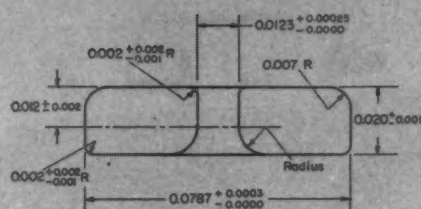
Typical ring jewel, dimensioned in inches. Side-play of shaft in this jewel can be held to less than 0.001-inch because of close tolerance on hole diameter
